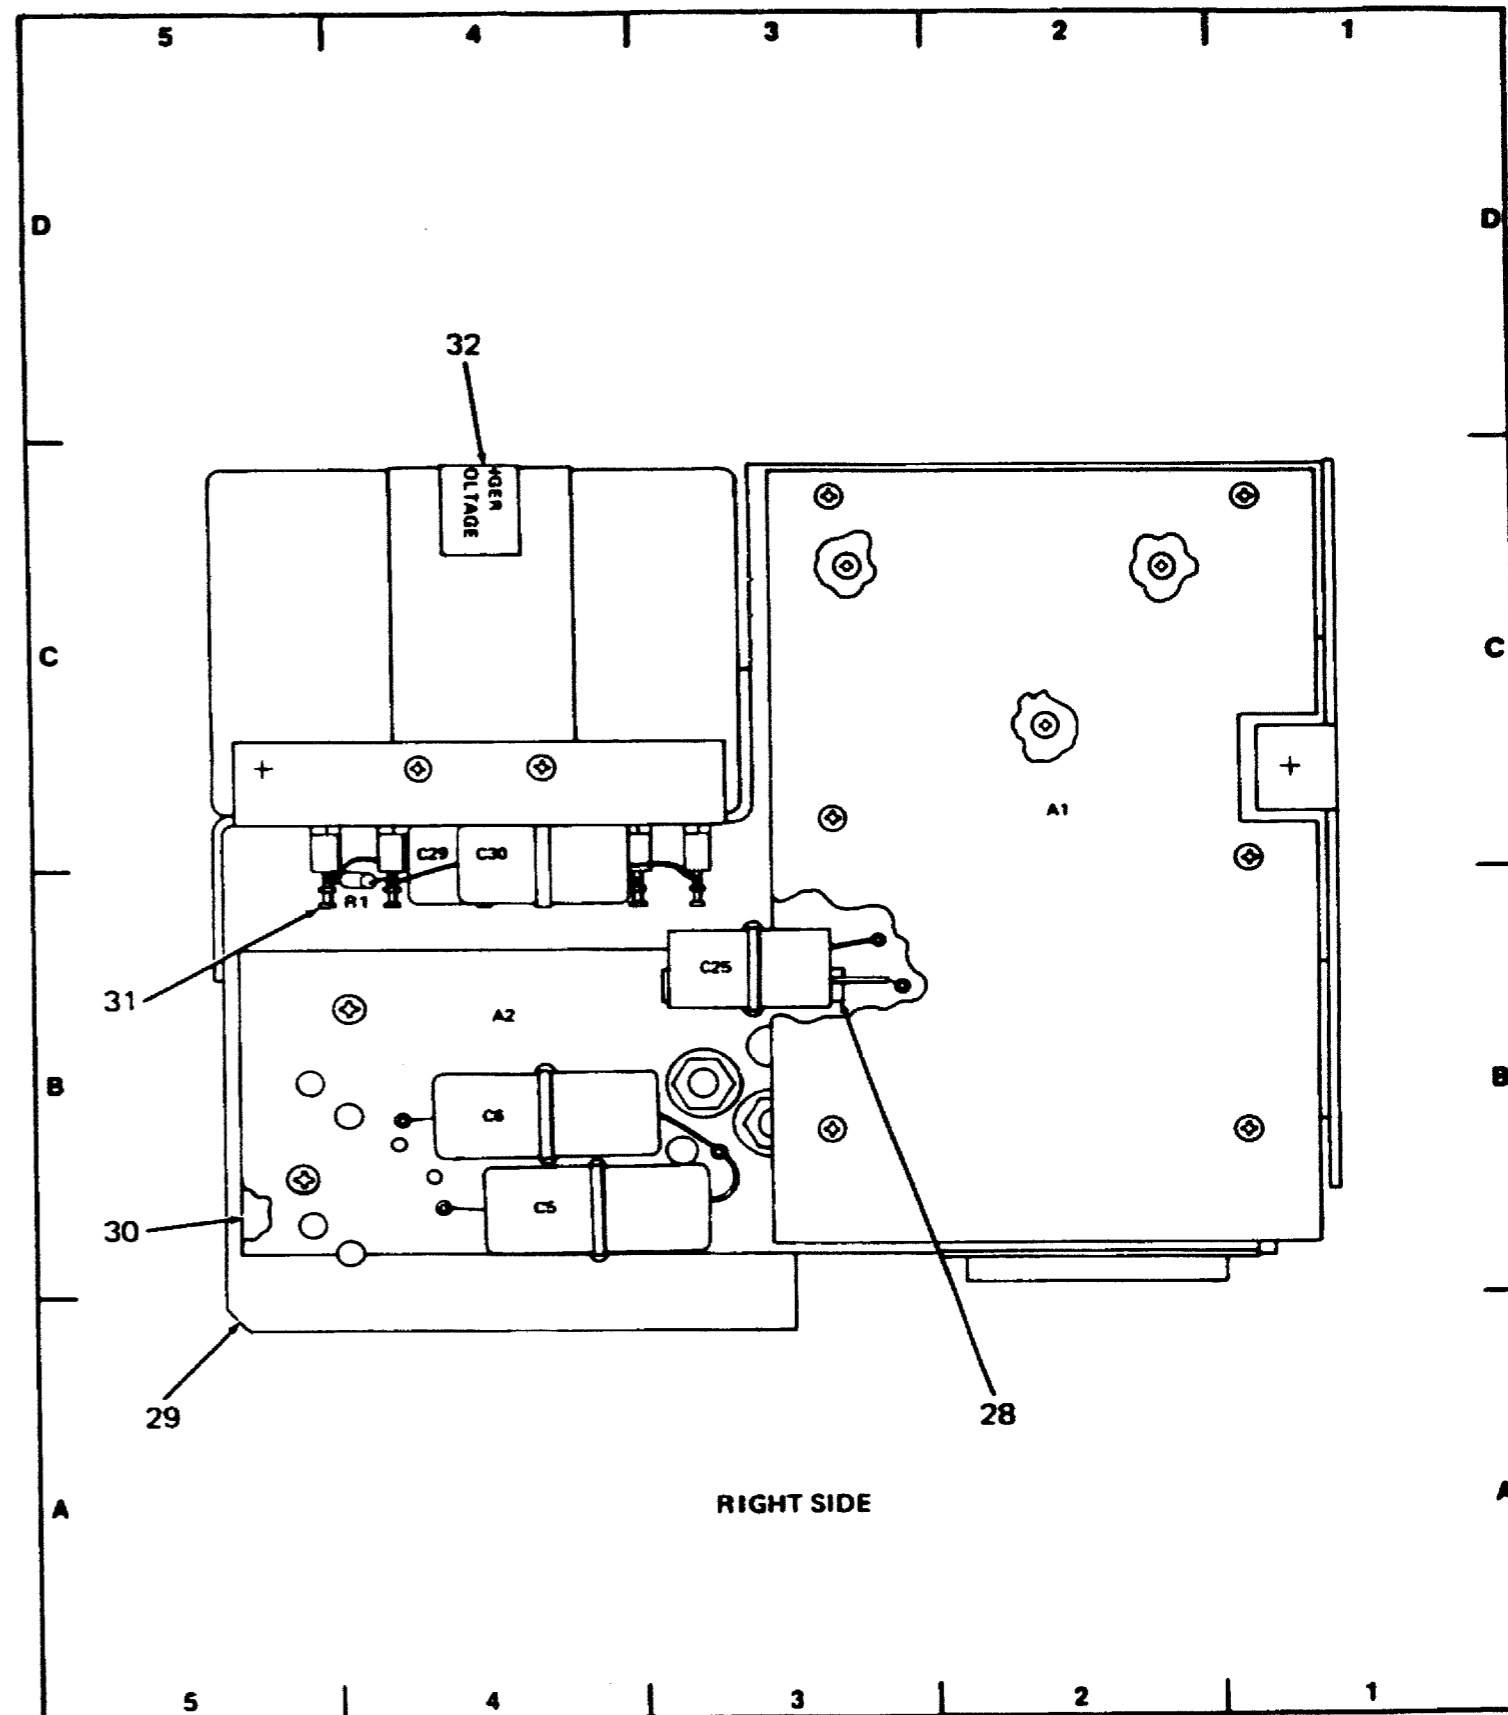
Power Supply Heat Sink Assembly (Sheet 3 of 4)
